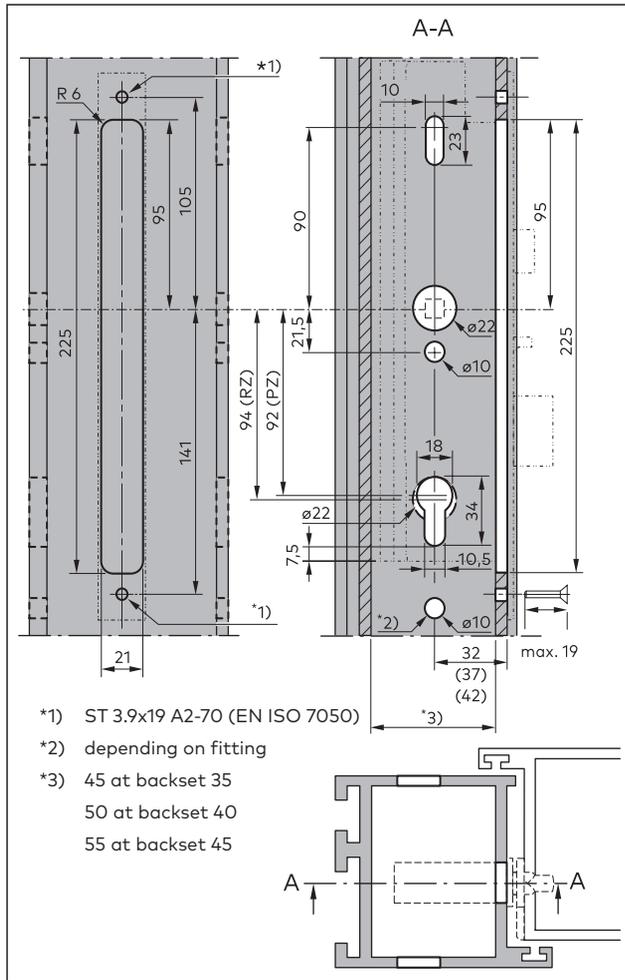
Cut-outs and pre-drilled holes in door leaf
